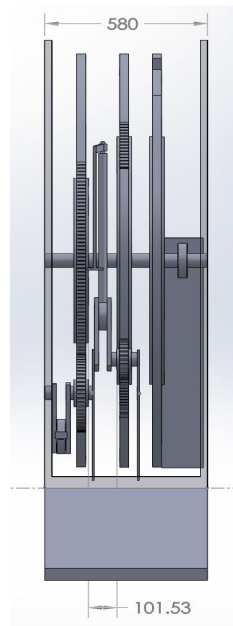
Pusher wheel and pinion in Solidworks
